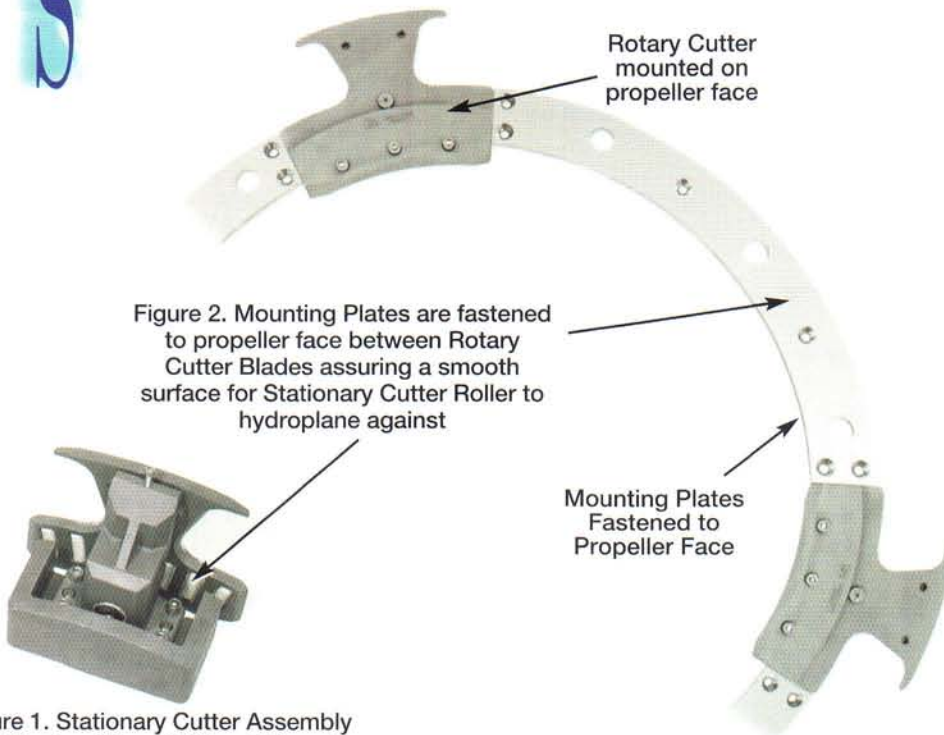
Mounting Plates are fastened to propeller face between Rotary Cutter Blades assuring a smooth surface for Stationary Cutter Roller to hydroplane against
